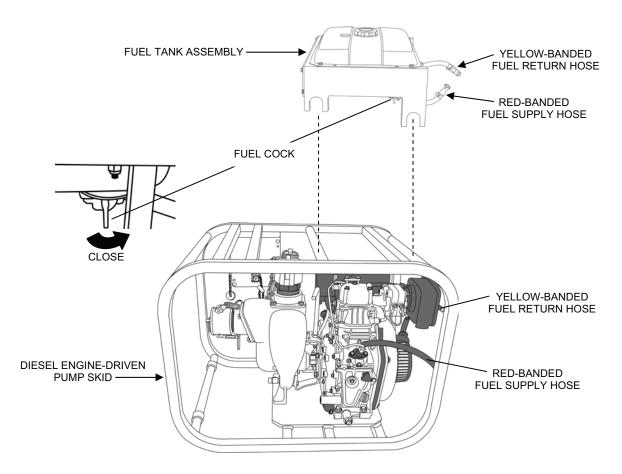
Extended Distribution Pump P-8 Skid Fuel Tank Assembly Removal.
